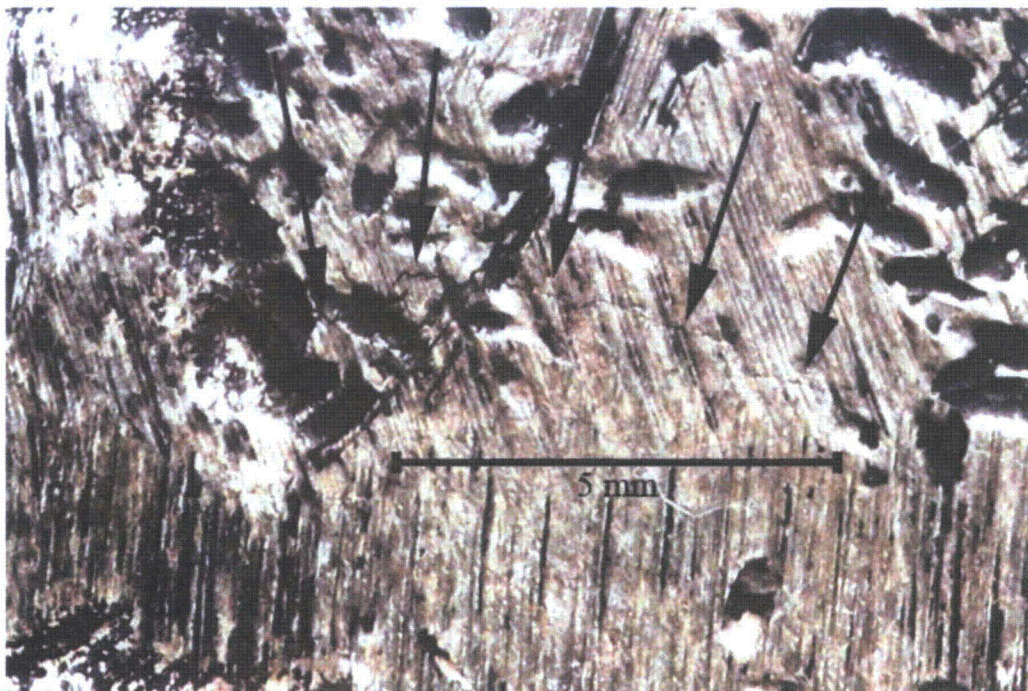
Crack-Like Indication Imaged Via Visual Testing at the Weld/Buttering Interface at 200 Degrees
